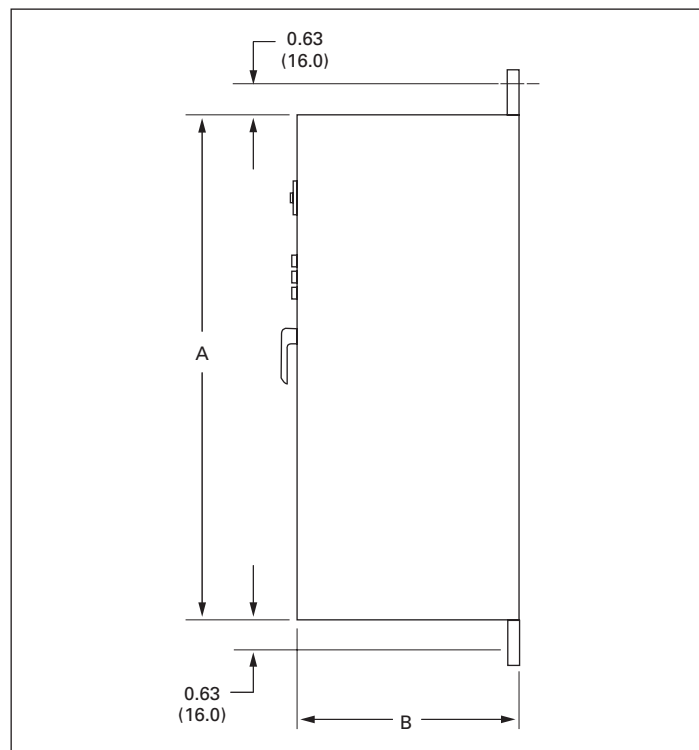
SIDE VIEW OF ENCLOSURE J
